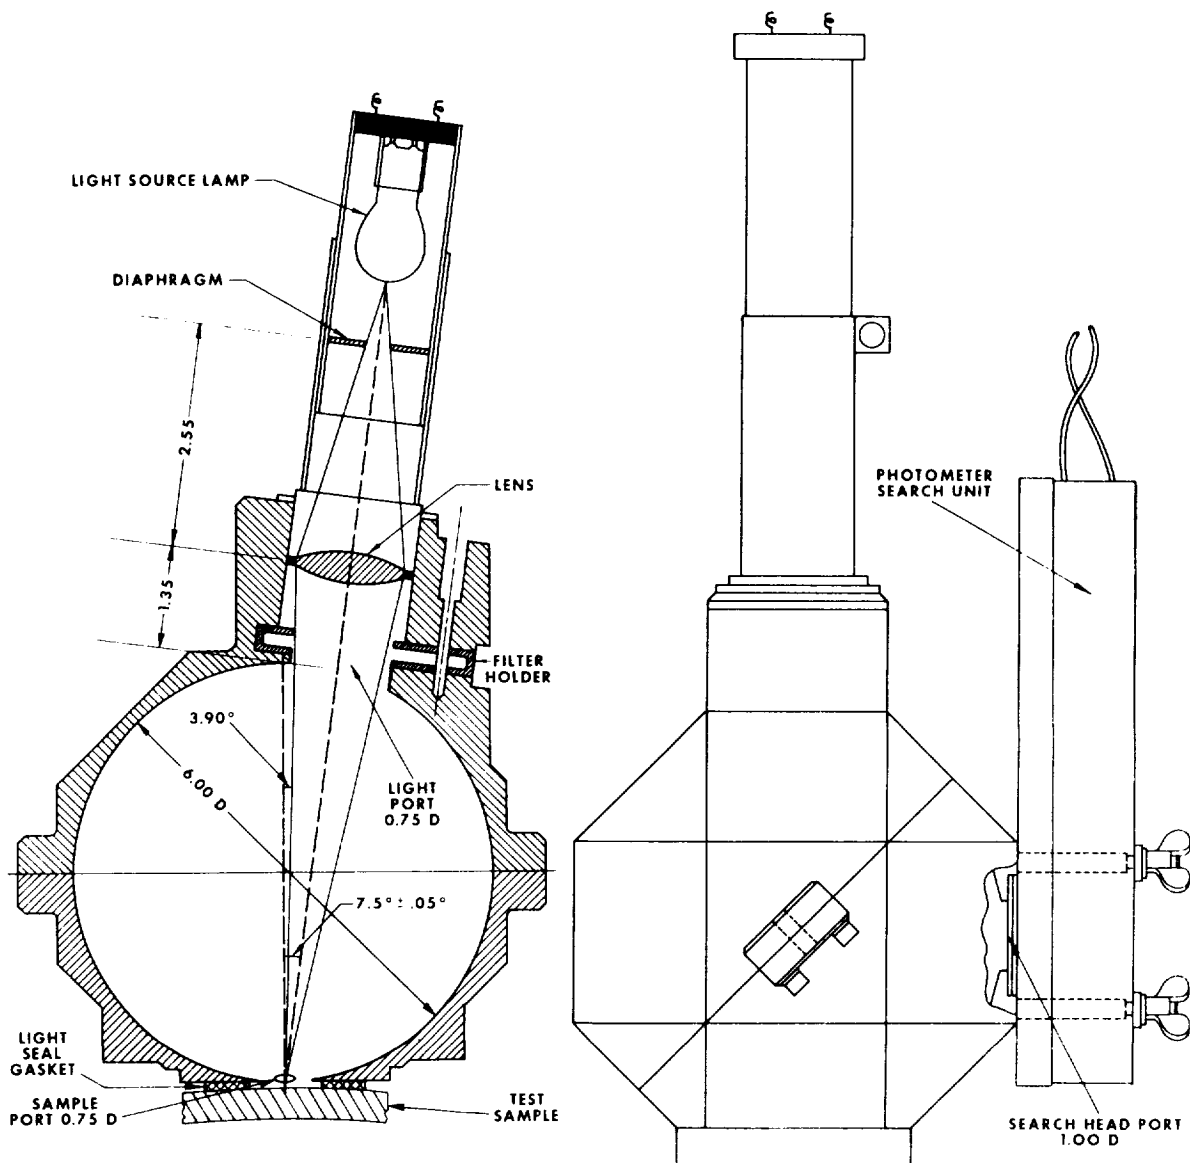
Cross-section view of integrating sphere. All dimensions in inches.
